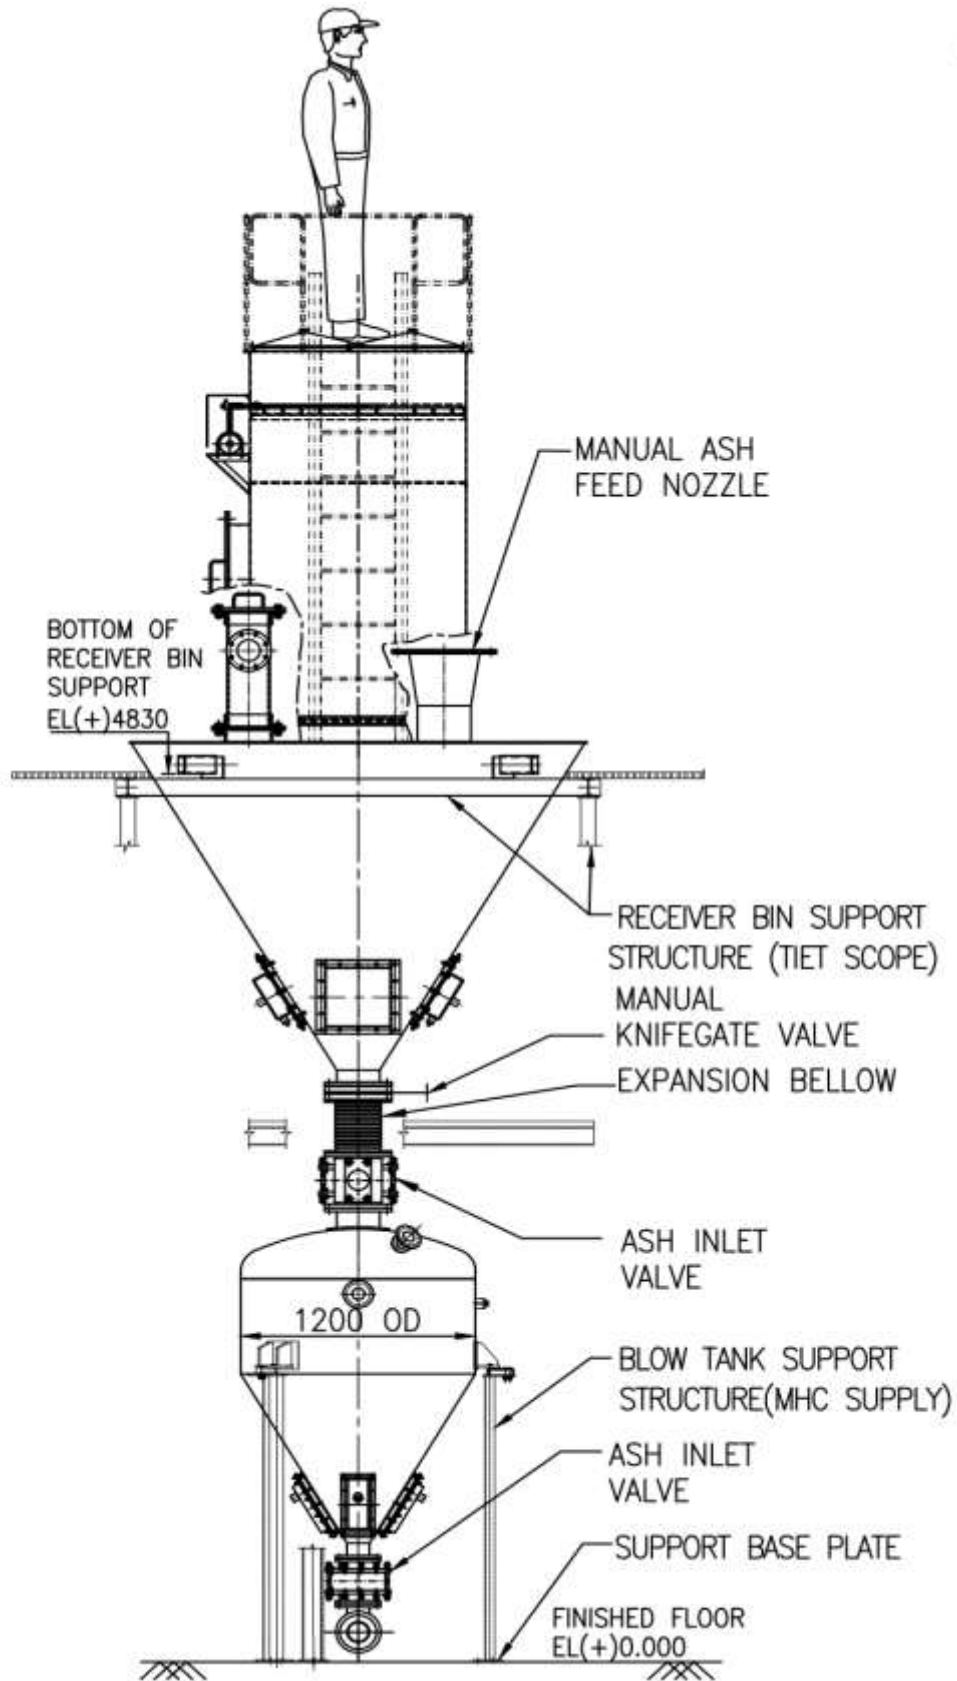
Side view of the positive pressure test rig stacked-up system assembly
